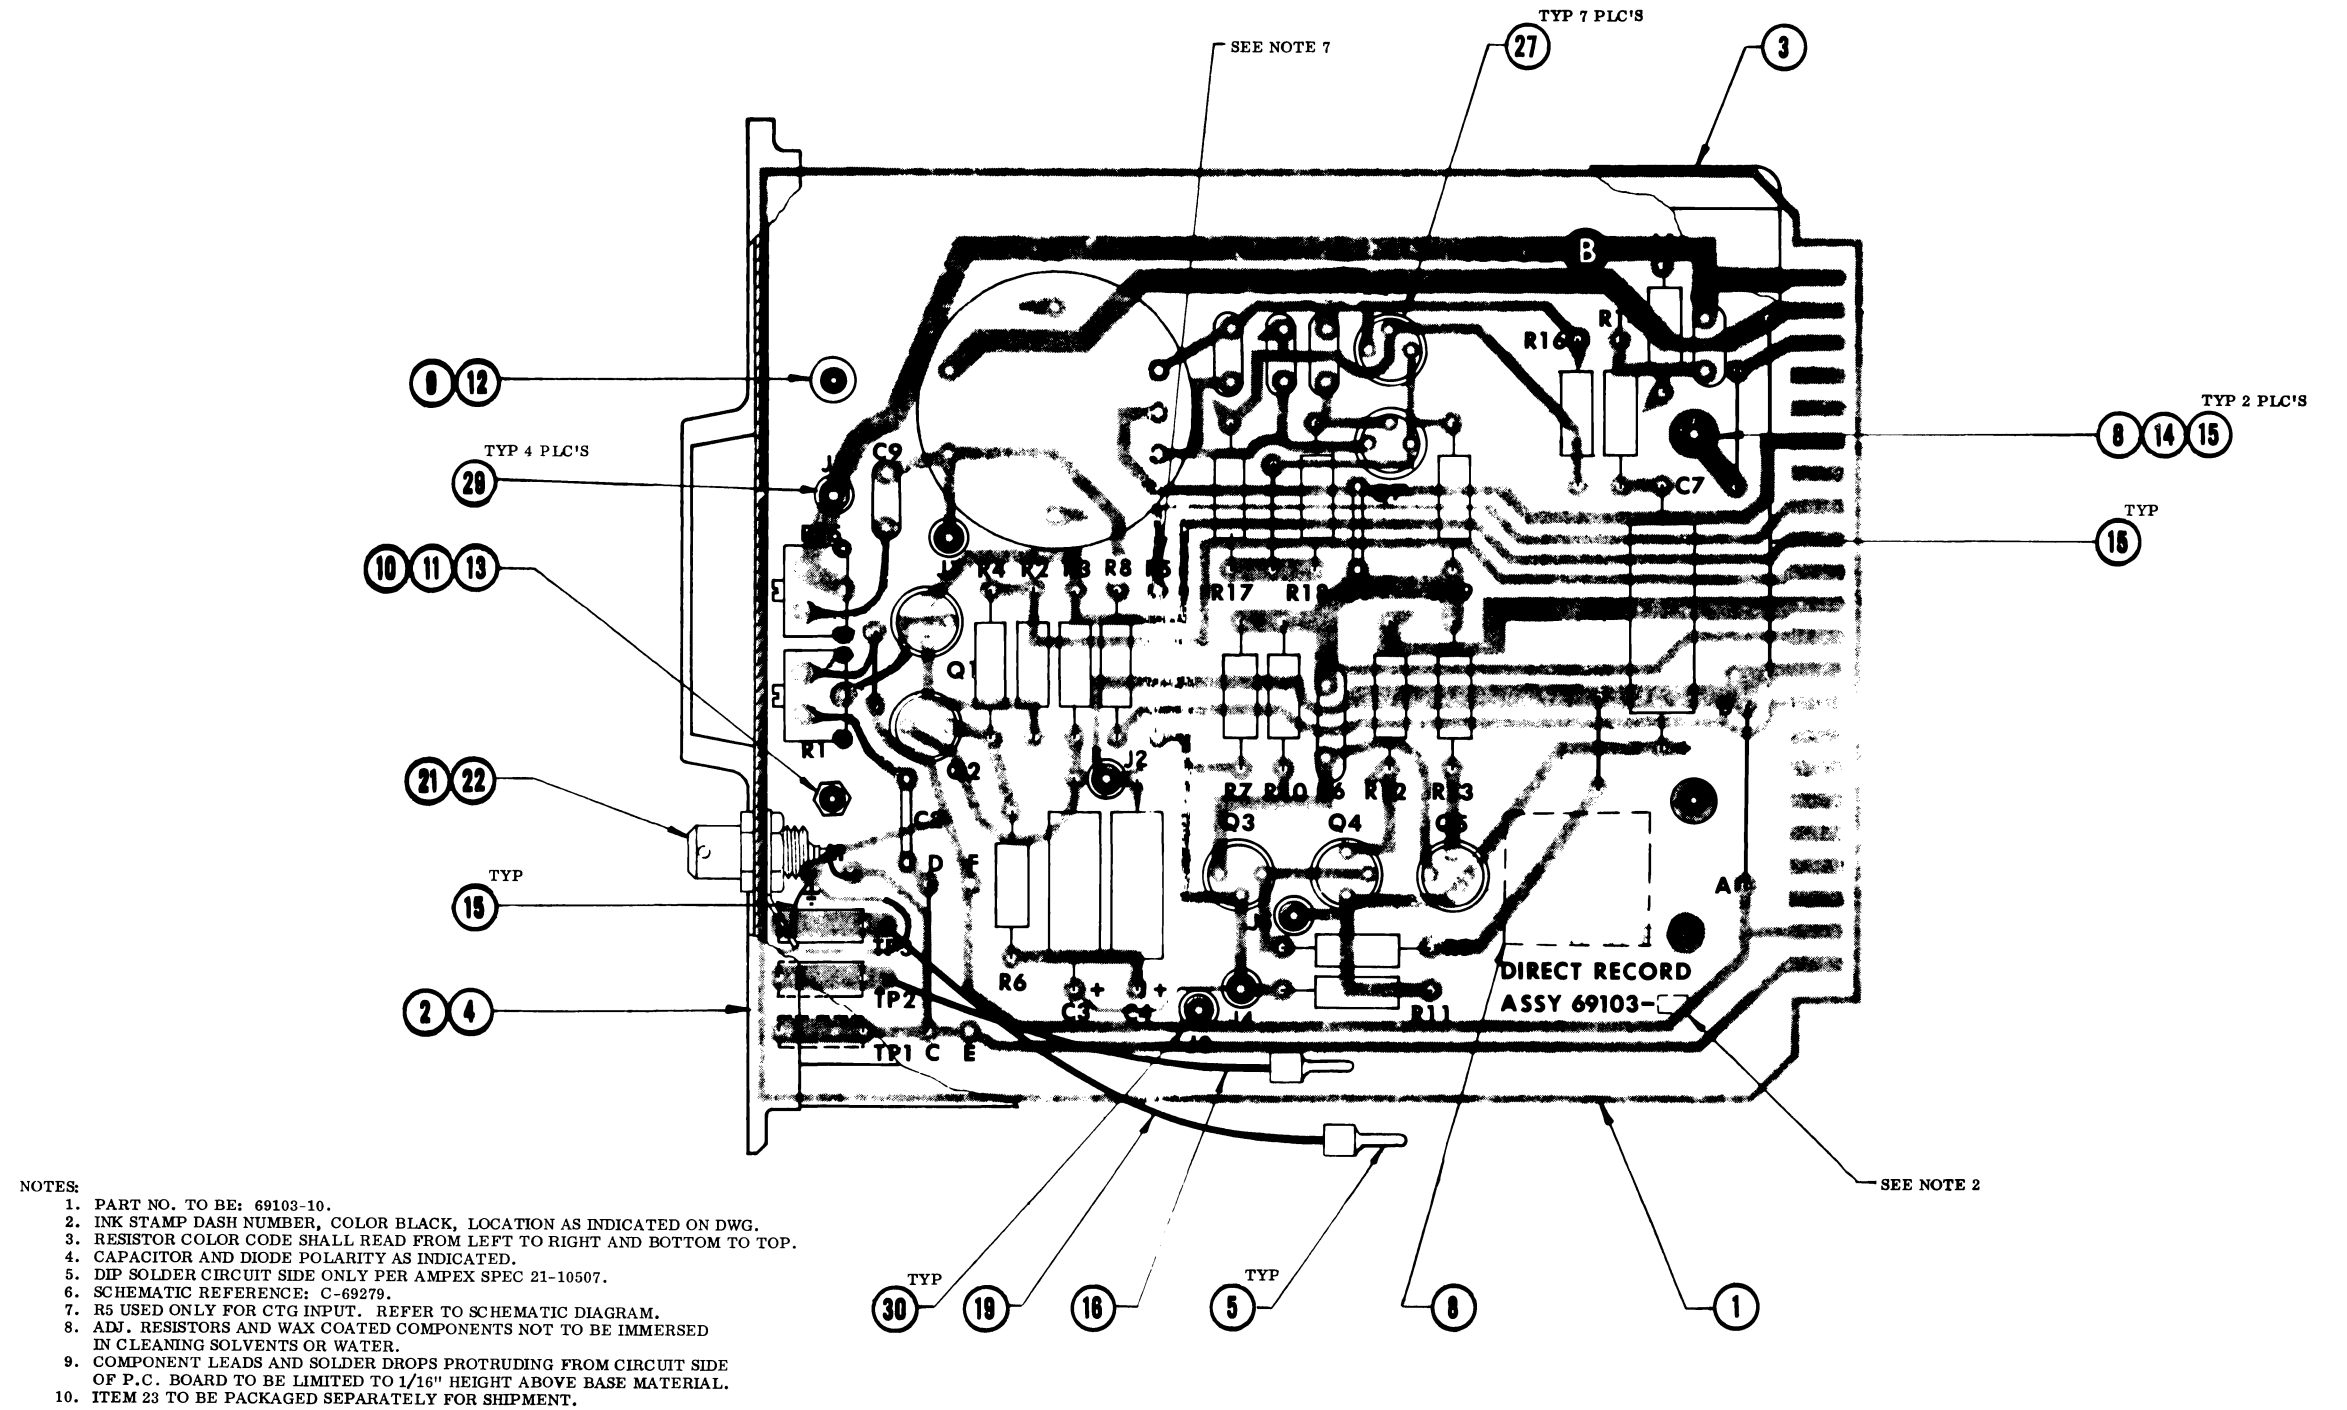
ES-100 Direct Record Amplifier Assembly Drawing
